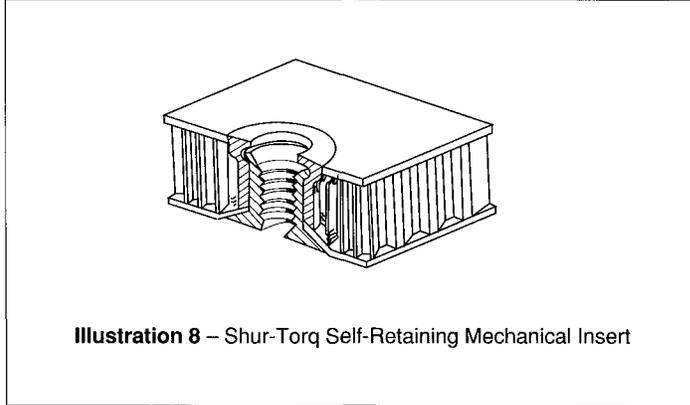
Shur-Torq Self-Retaining Mechanical Insert
